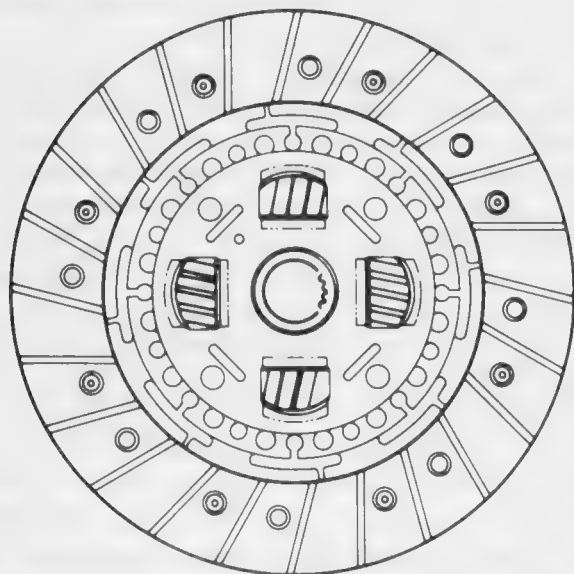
A-4 Clutch Driven Plate—Six-Cylinder Engine
